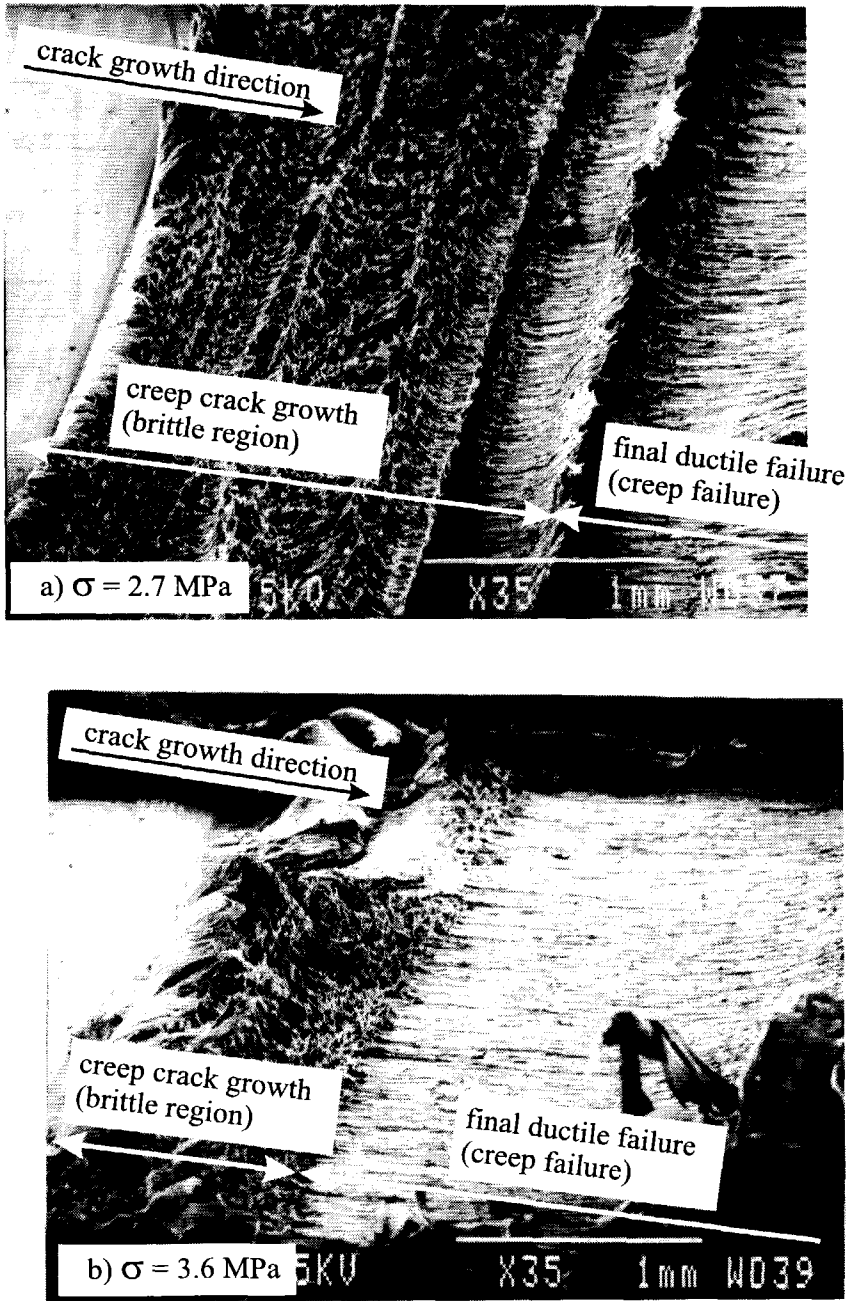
Tilted views of the fracture surface of PENT test specimens (material O, stress levels $\sigma = 2.7$ and 3.6 MPa respectively, 80°C).
